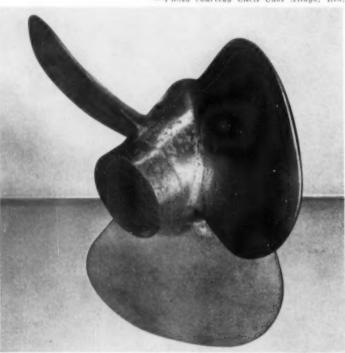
Marine propeller shell cast in Alcan 350-W. Inch per inch tolerances held are: + 0.000 and -0.005 on blade working faces, + 0.000 and -0.015 on reverse faces, \pm 10 minutes of are on pitch ang'es and \pm 10 minutes of are on rake angles. Machining time is reduced 90 percent and over-all cost reduction is 50 percent over previous methods.
